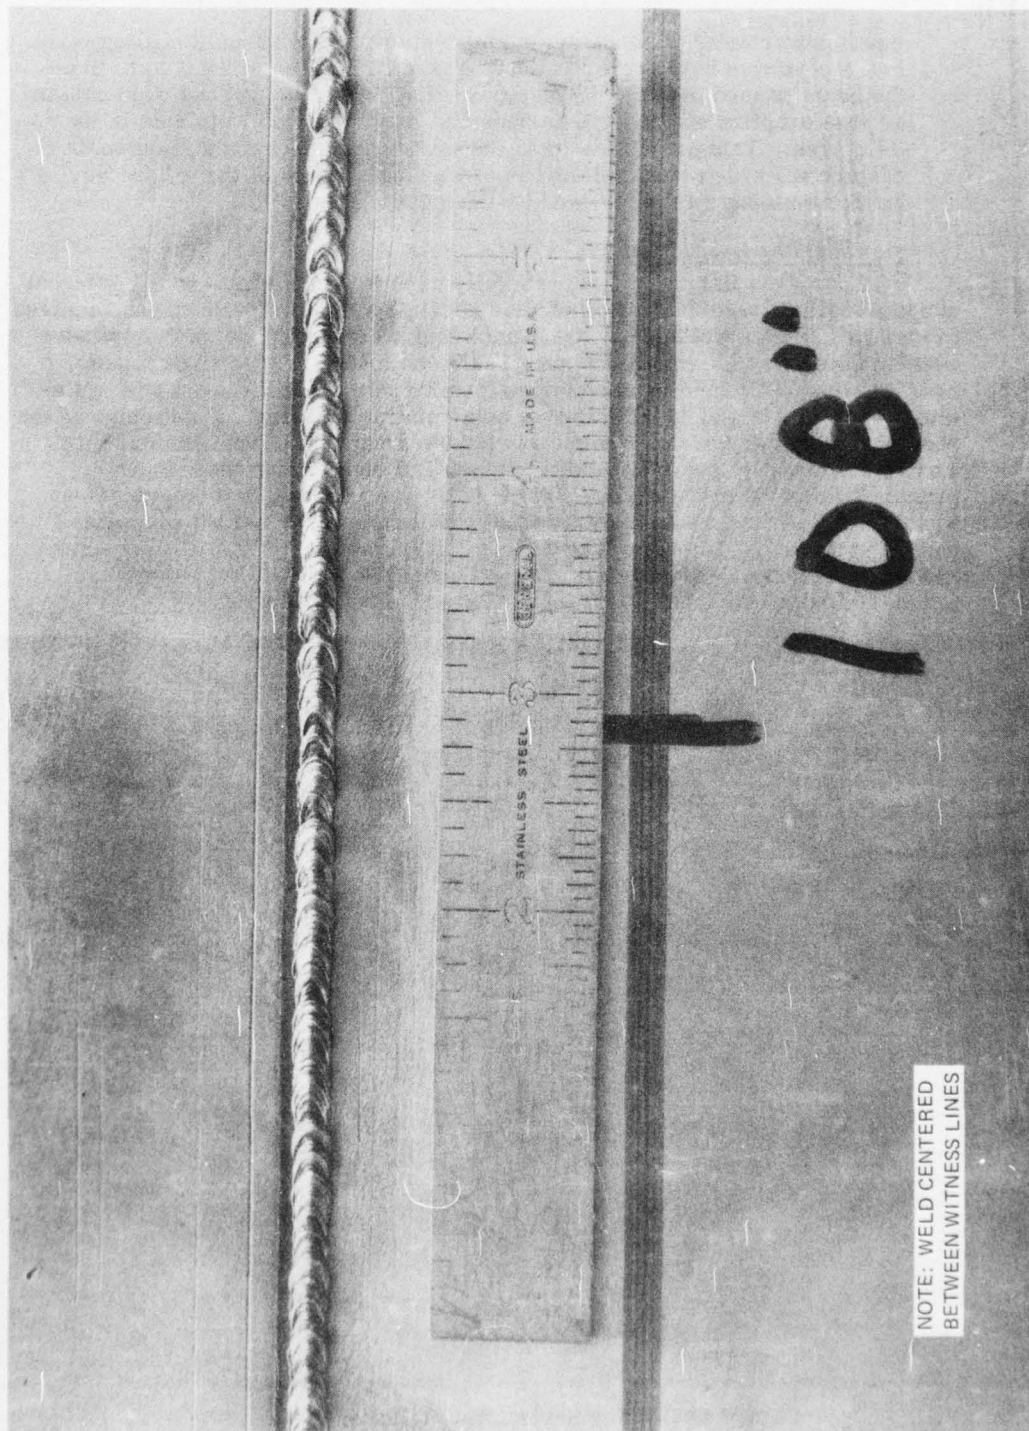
Five to Seven-Foot-Long Section of SSEB Cylinder Weld
